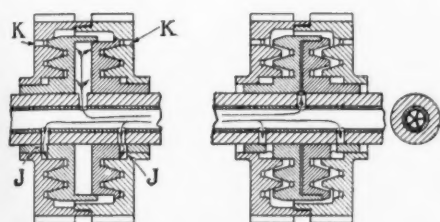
Diagram showing the gear with hydraulically operated internal clutches. Arrows indicate the direction of oil flows when the clutches are engaged and disengaged
